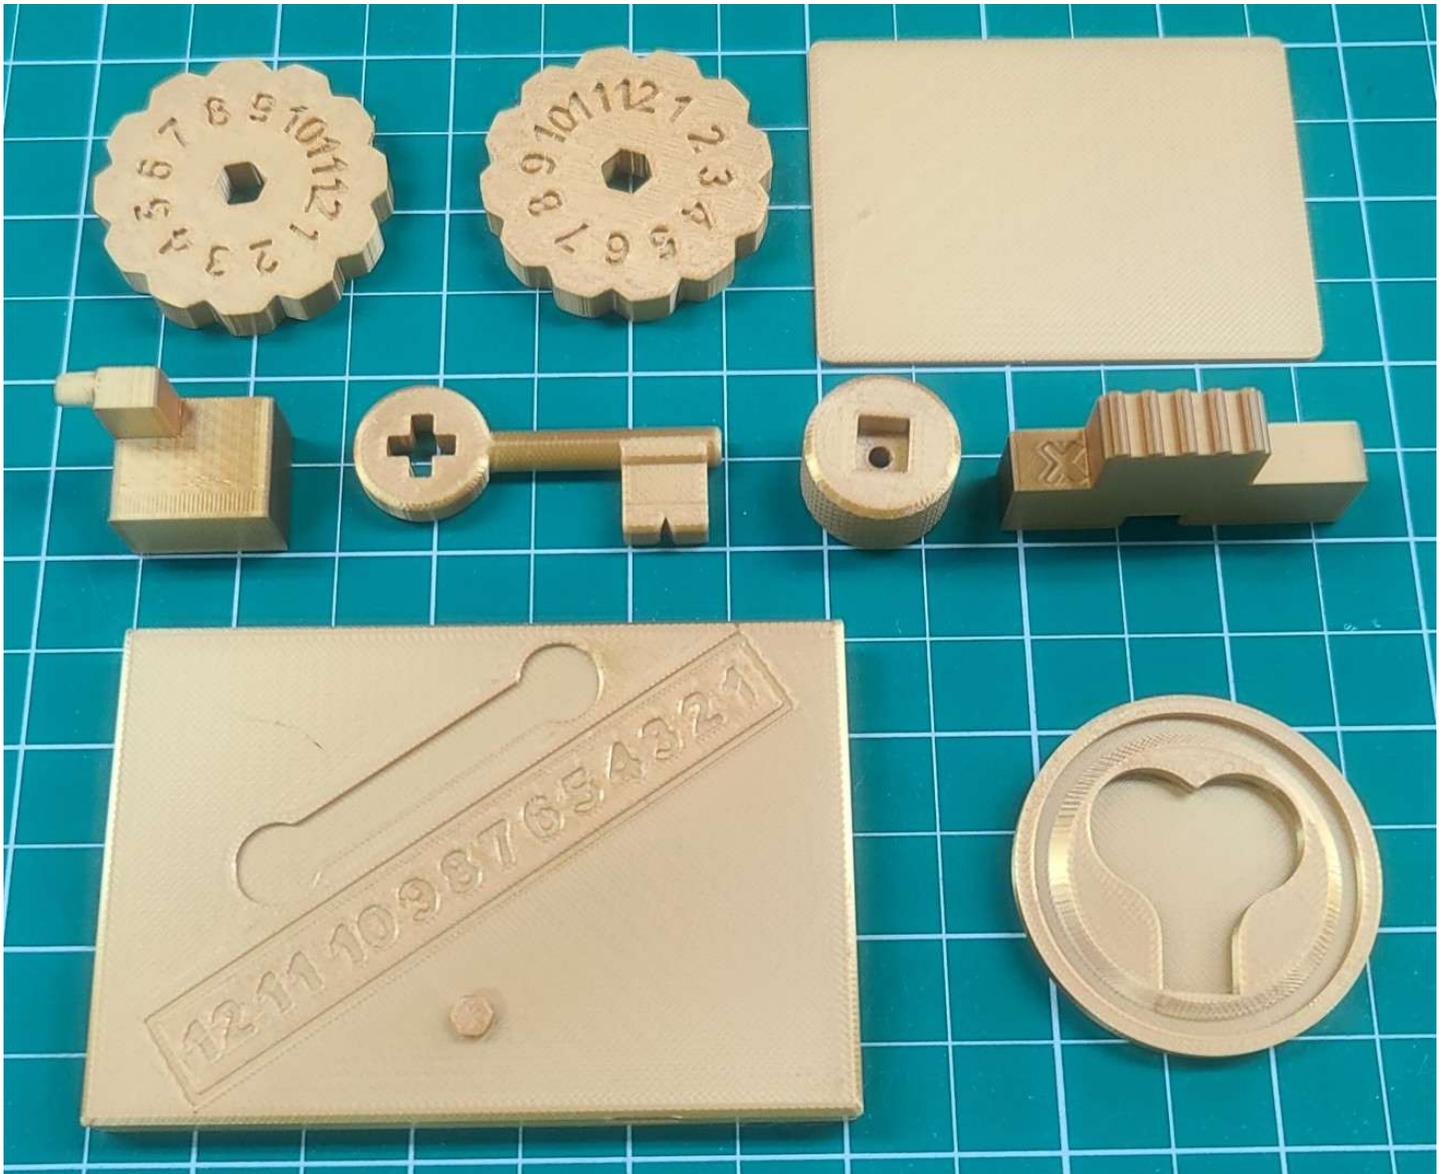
Steam Machine Puzzle Box Gold Silk PLA Parts
